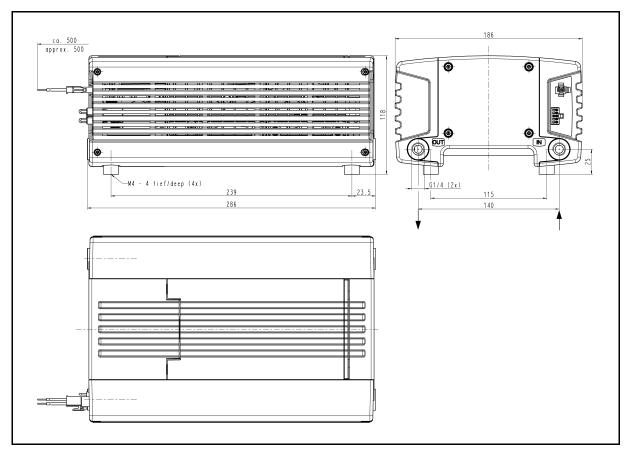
Attachment dimensions of N 950.50 KNDC-B (dimensional tolerances according to DIN ISO 2768-1, tolerance class V)
